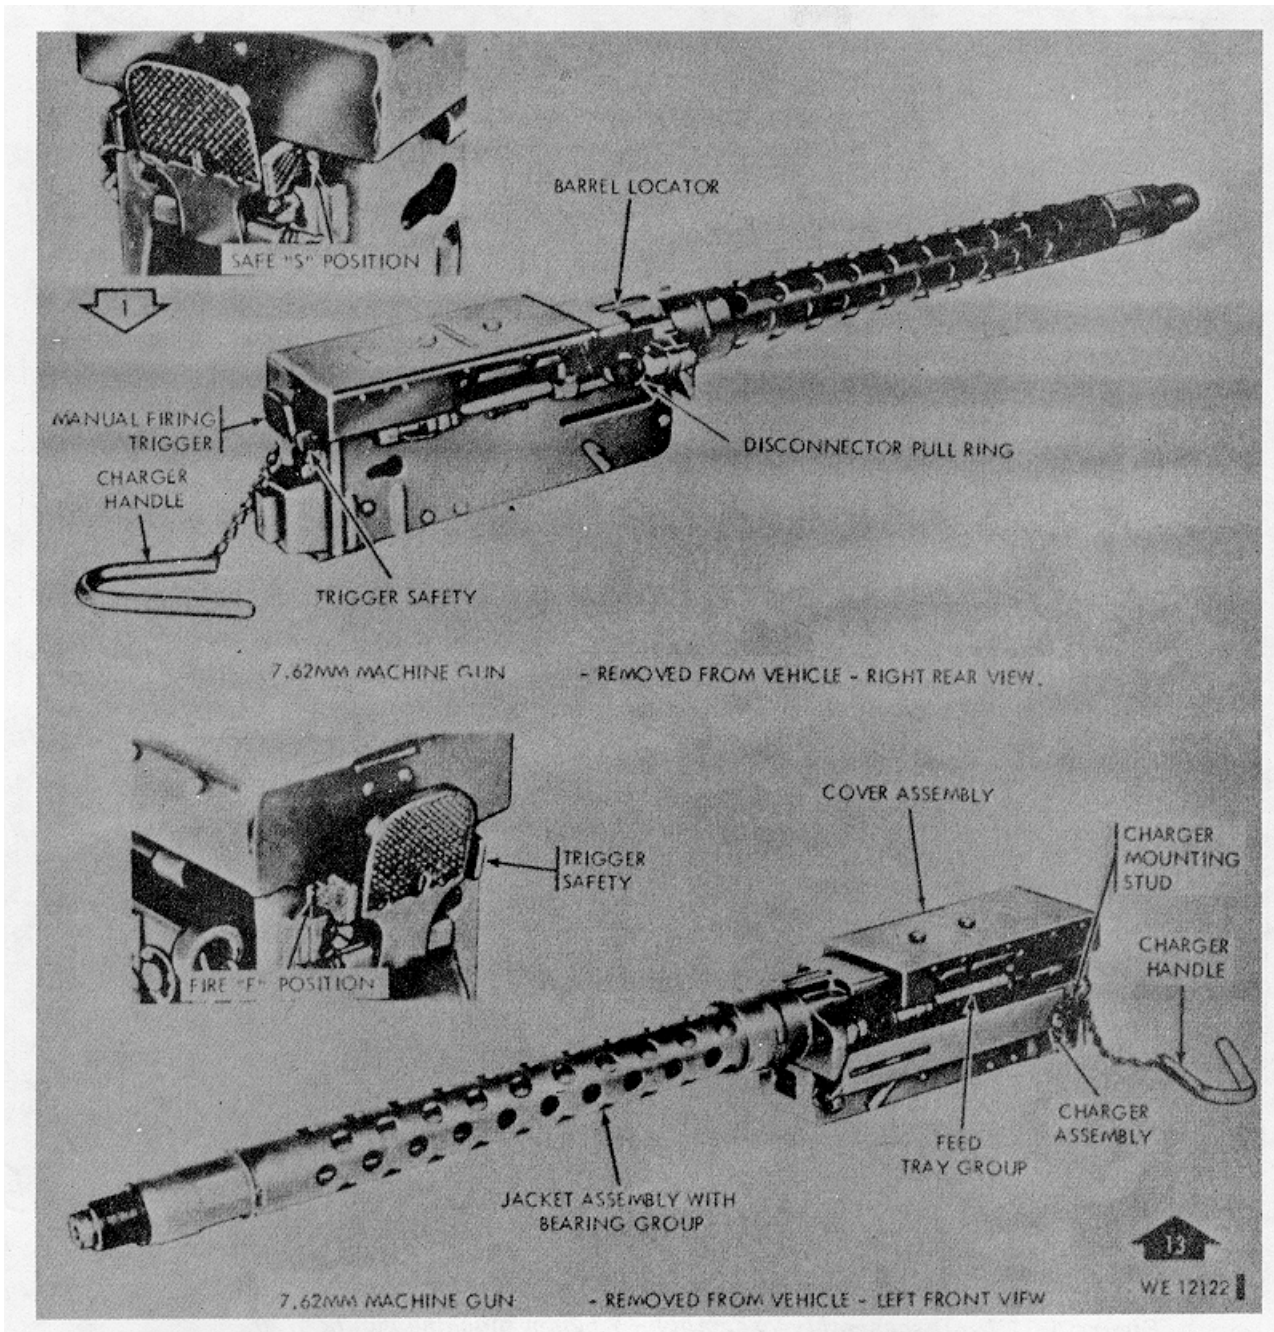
Disassembly/assembly - 7.62 mm machine gun (1 of 4)
